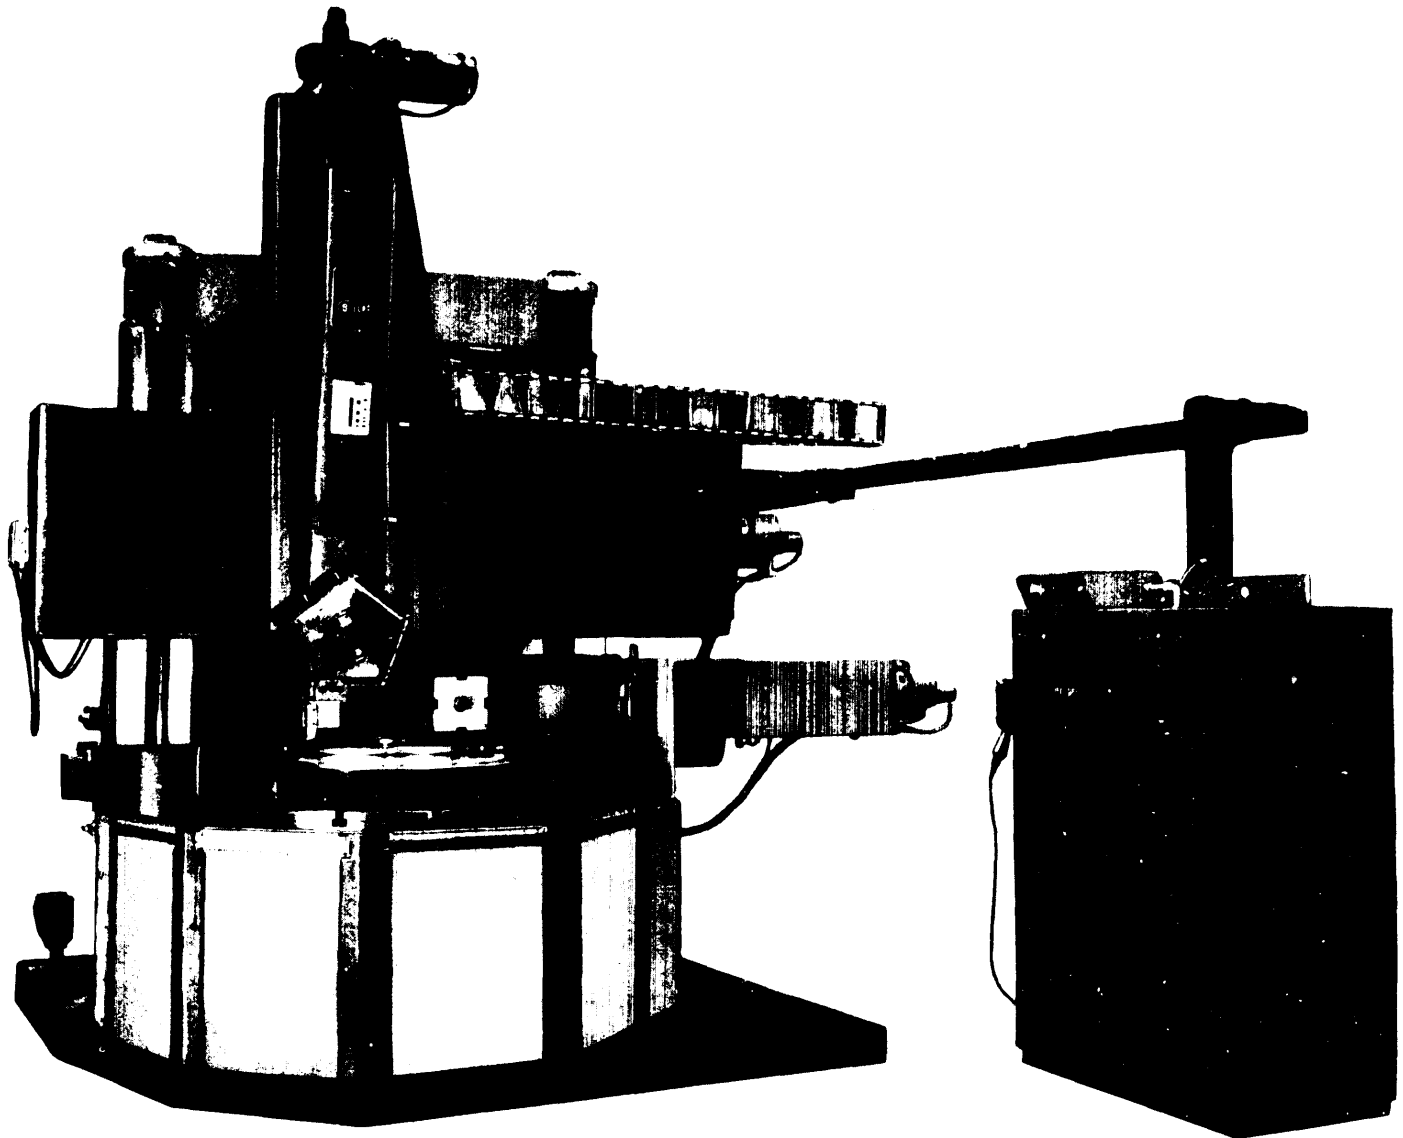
Four-axis, numerically controlled vertical turret lathe (Bullard/White Consolidated Machine Tool Group).
